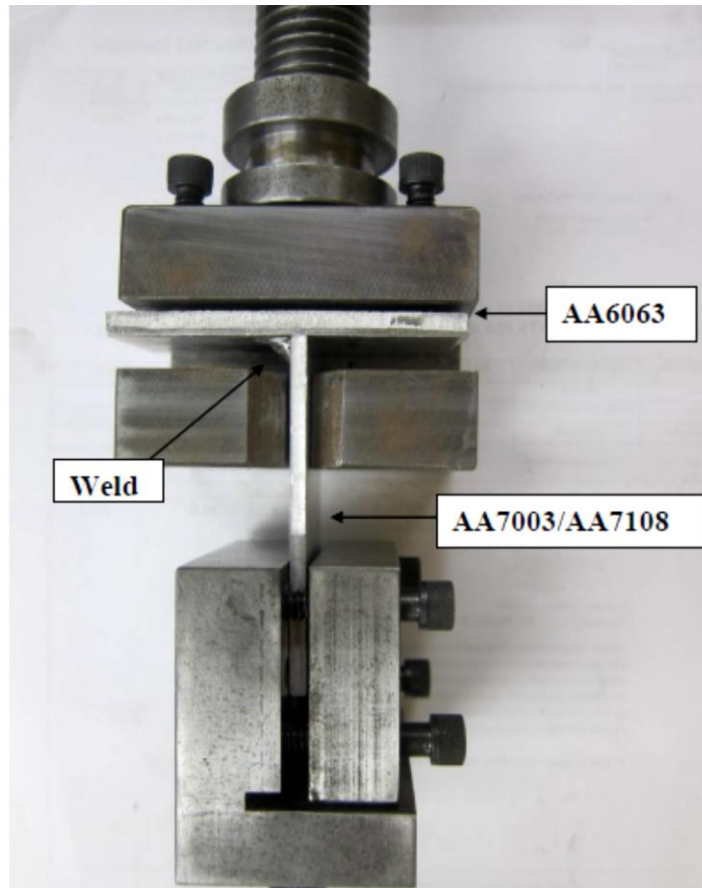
Typical arrangement of a AA7xxx T-joint weld in the custom jig - all major weld assembly parts are labeled.
